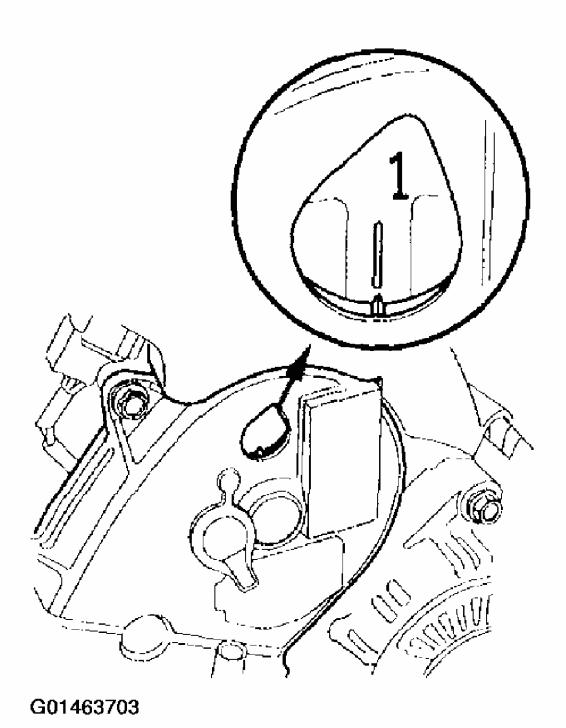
Checking The Camshaft Pulley Marks (Front Camshaft Pulley) Courtesy of AMERICAN HONDA MOTOR CO., INC.
